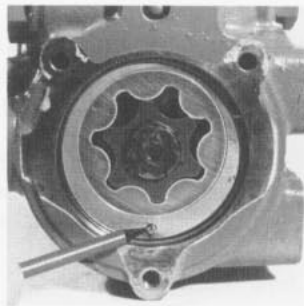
Orienting Gerotor Ring and Pin (CCW) (Earlier Units Shown)
